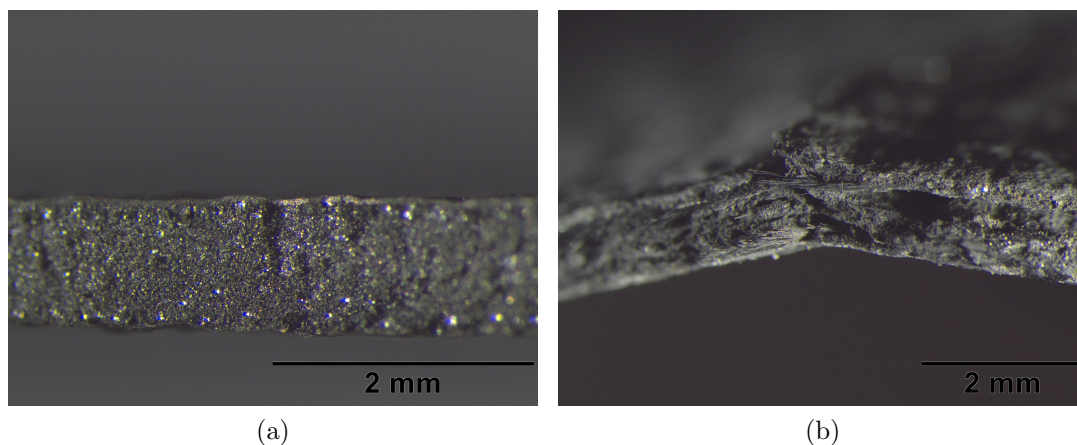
Stereoscope images showing (a) the fracture surface of a sintered Ti_2AlC disc and (b) the fracture of a sintered CMC disc.
